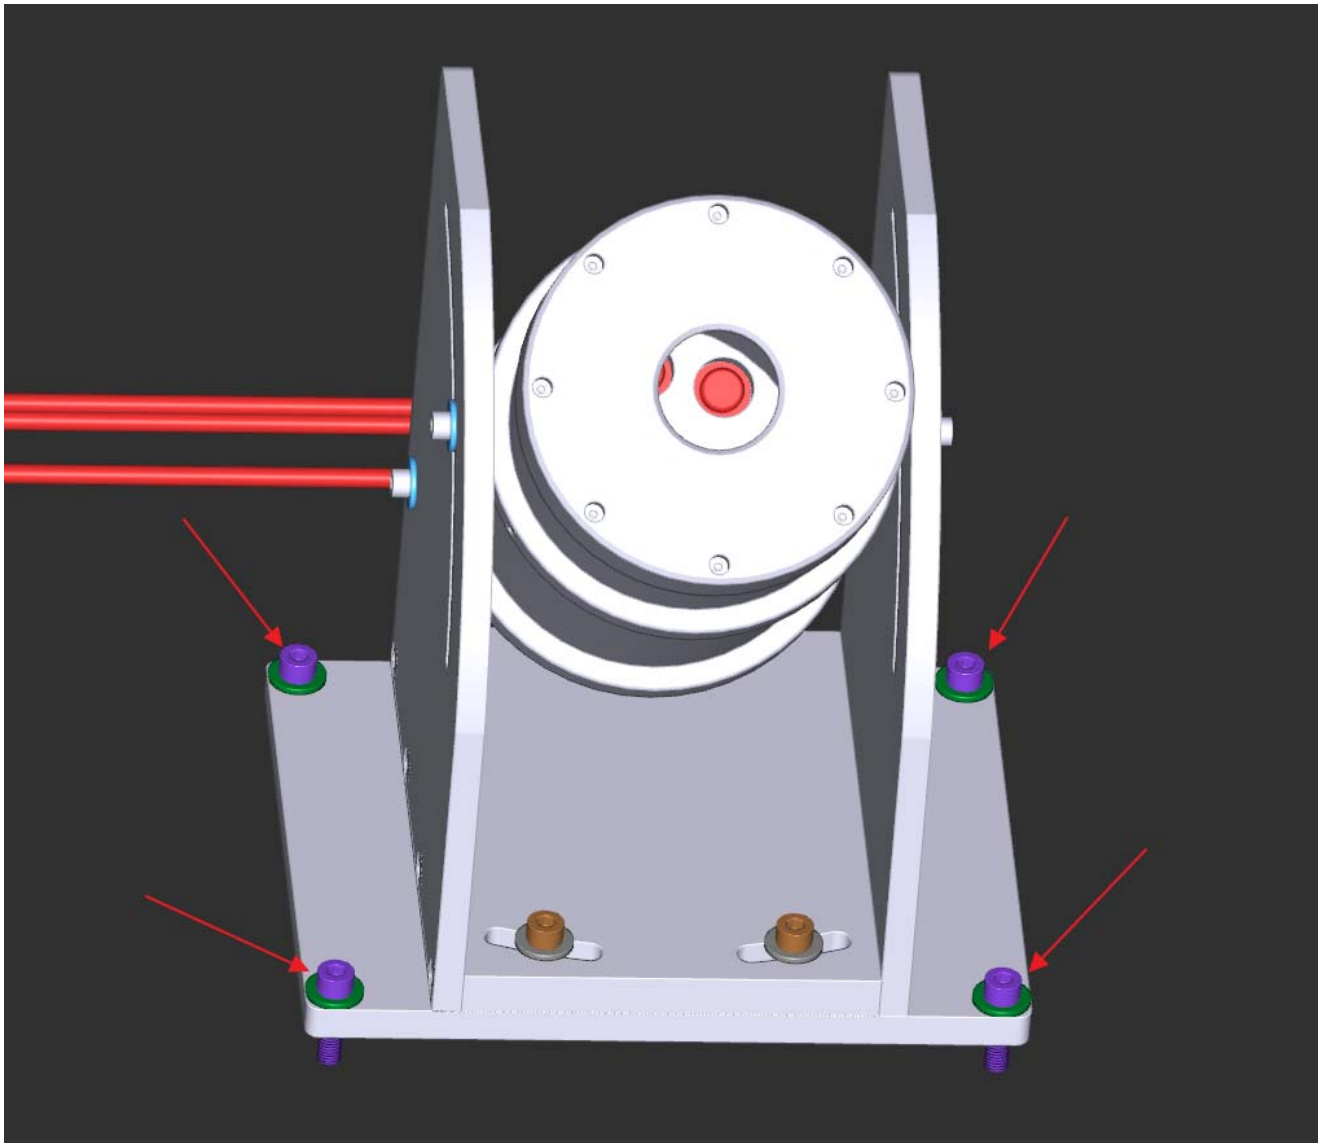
Position of the four $\varnothing 8$ mm holes to attach the base table system to a stable structure or assembly.
